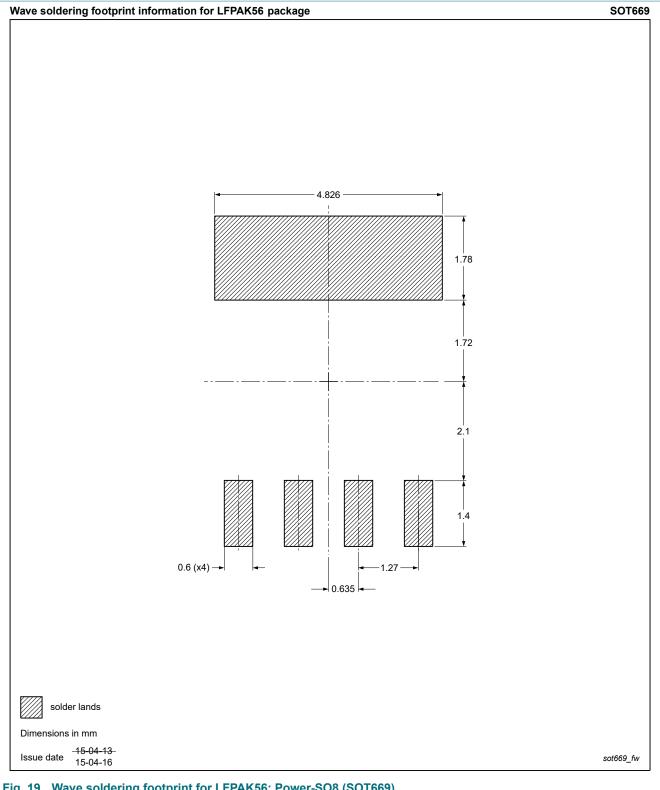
Wave soldering footprint for LFPAK56; Power-SO8 (SOT669)
